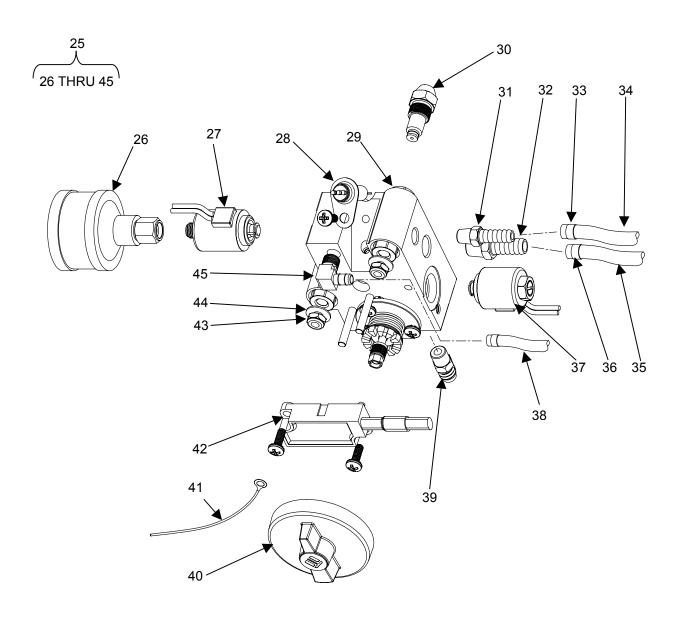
Fuel Delivery Block Assembly (Sheet 2 of 2)
